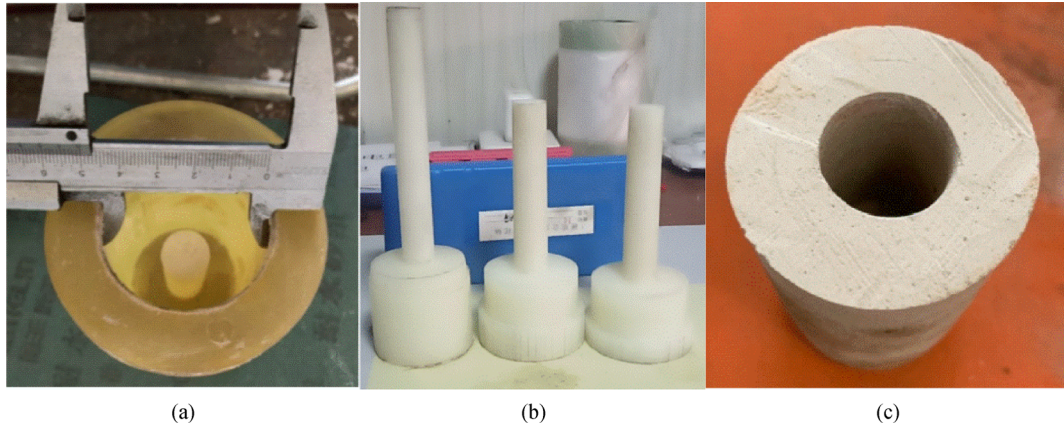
Mold and sample: (a) mold; (b) mold base; (c) solidified sample.
